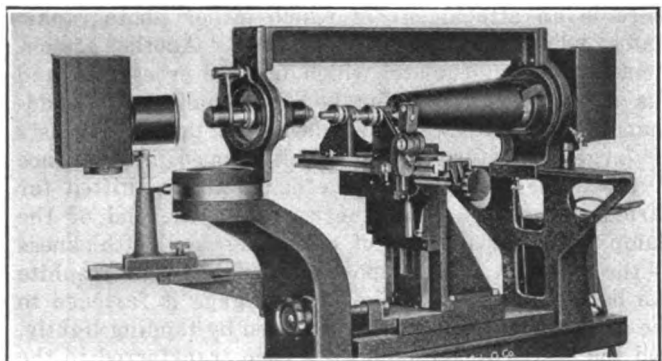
CONTOUR MEASURING PROJECTOR WITH GEAR AND OPAQUE LOW-MAGNIFICATION ATTACHMENTS IN POSITION
